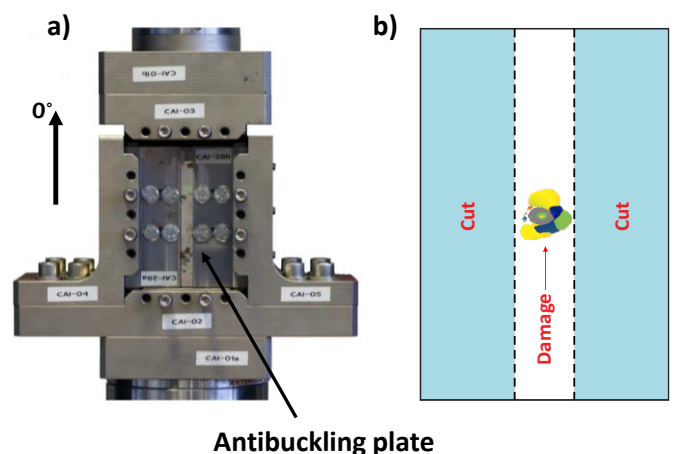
a) Non-conventional compression after impact (CAI) test fixture (based on Remacha M. *et al.* (2015) [23]) b) Specimens cutting prior to inspection by micro-computed tomography (μCT)
